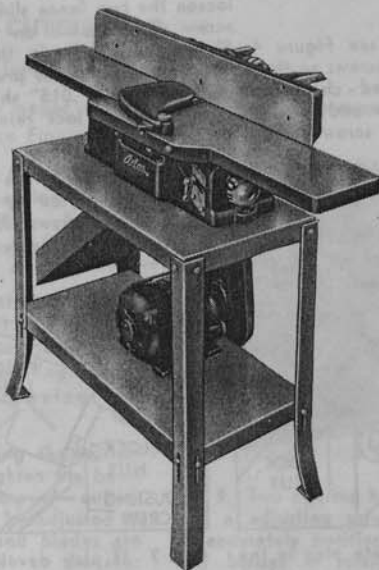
ATLAS Jointer mounted on No. 9020 Machine Stand
